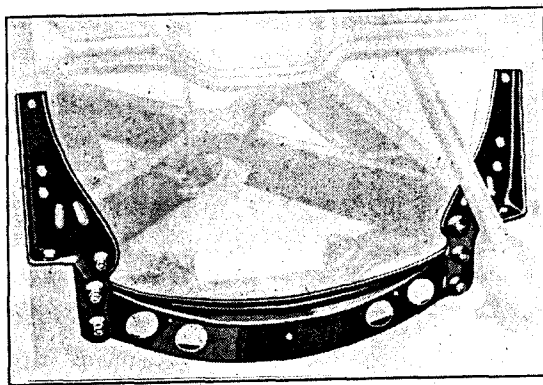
The LaSalle frame is further strengthened by a removable cross member under the rear end of the engine. This cross member must be removed to dismount the clutch housing pan for working on the clutch from the under side.
